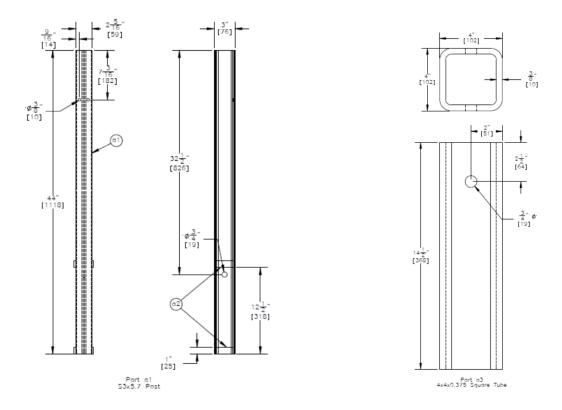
Post Assembly and Socket Tube from the MGS Bridge Rail [3]
